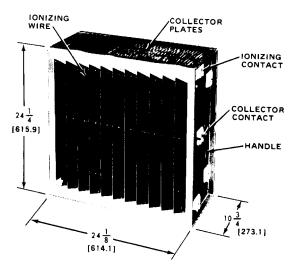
PN 38010, ELECTRONIC CELL COMPONENTS. DIMENSIONS IN INCHES [MILLIMETERS SHOWN IN BRACKETS].
